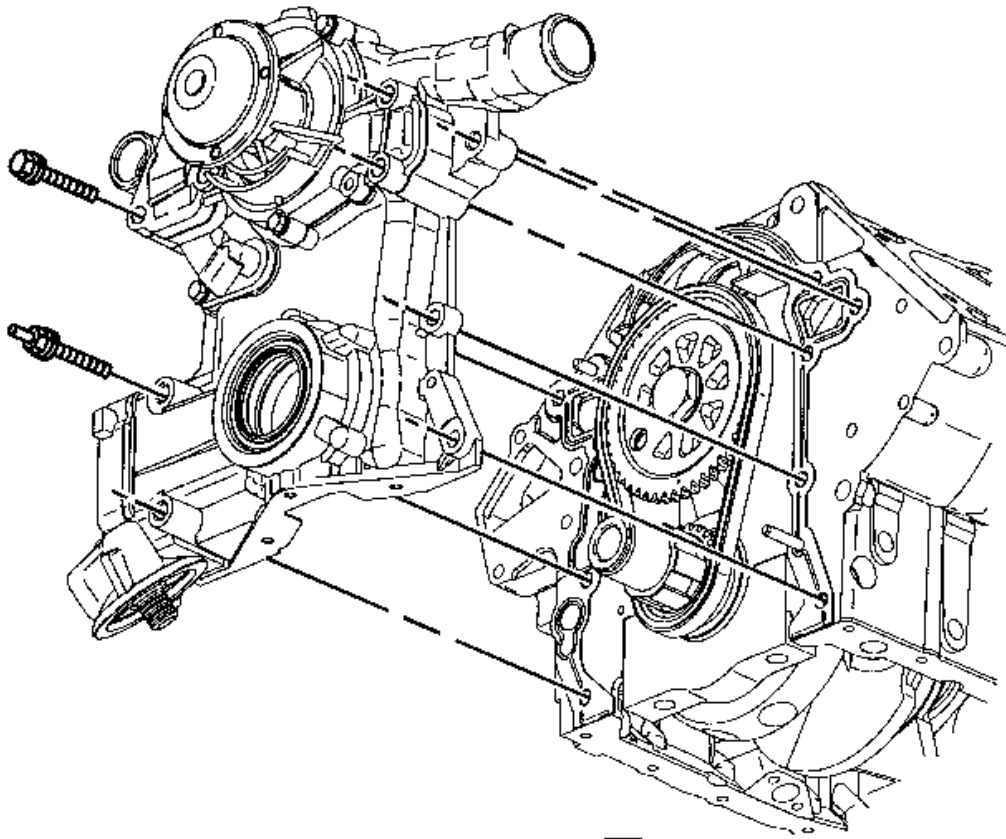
Removing Engine Front Cover & Oil Filter Adapter
